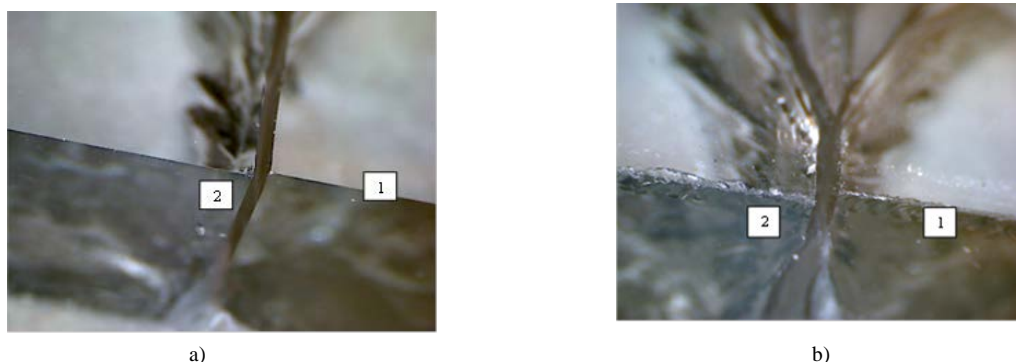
a) Sharp edge 1 and source of fracture - micro-crack 2 under bending, b) Defects in cut edge 1 and micro-crack 2 - the focus of fracture under bending
